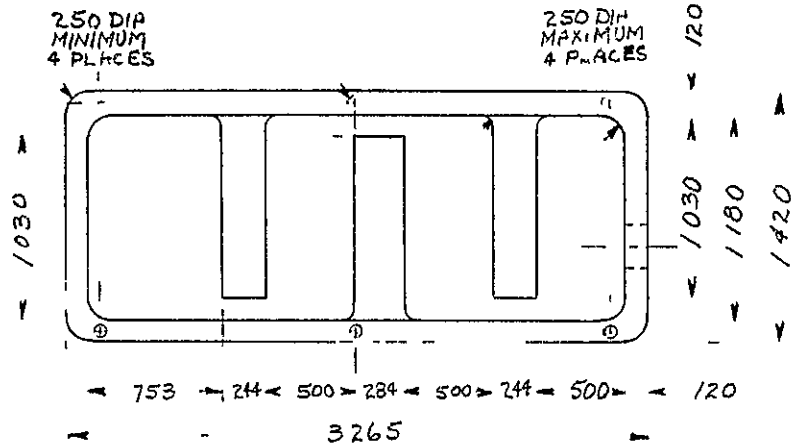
MECHANICAL DRAWING OF FILTER INSERT
